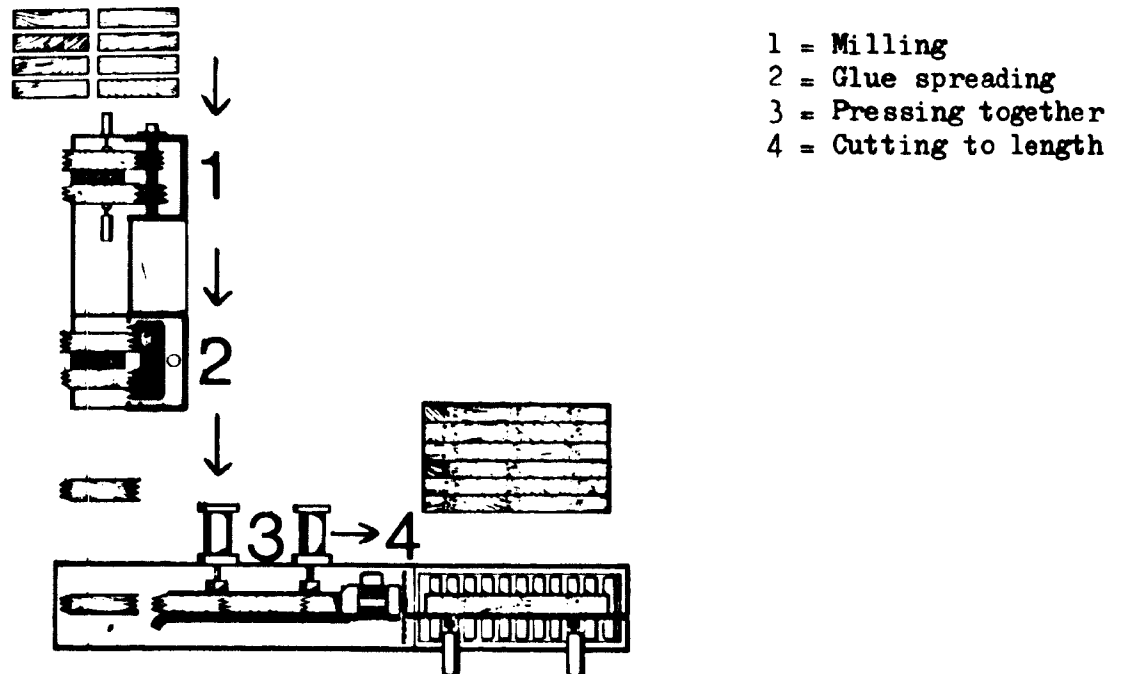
Finger jointing plant, consisting of universal milling machine and press with cross-cut saw. Off cuts can be processed into useful timber starting from 200 mm lengths.
